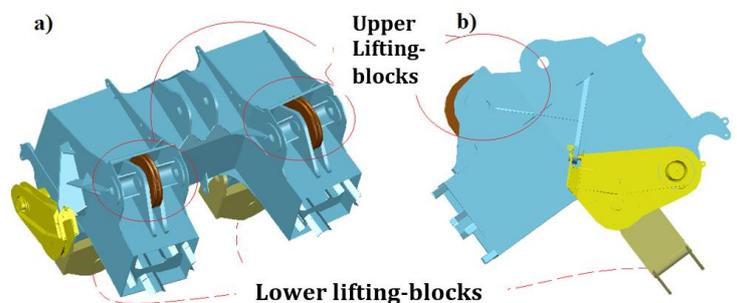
3D drawing of the head section a) Isometric view b) side view
